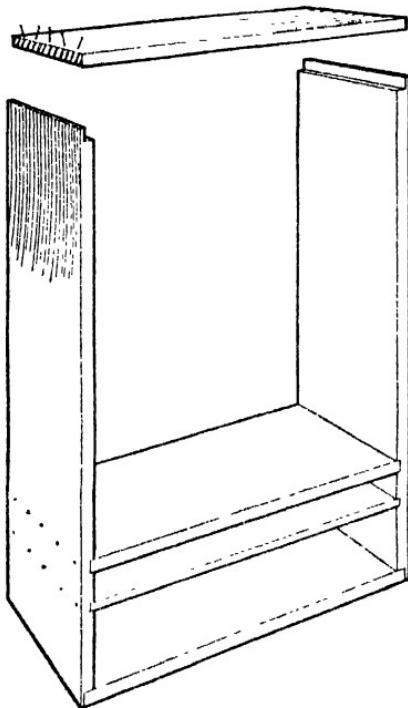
CONSTRUCTION OF TOOL CUPBOARD.
